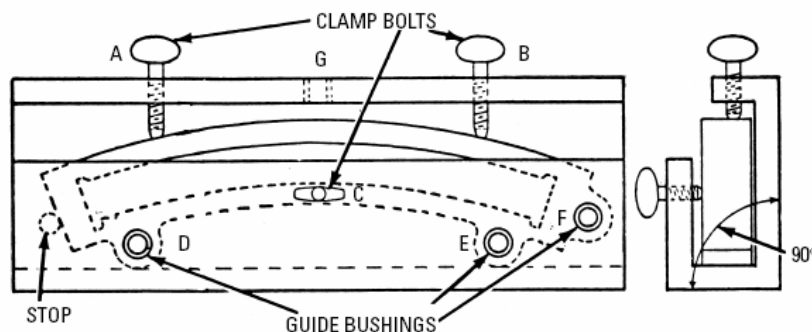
using the box jig for drilling holes in an engine link [6]
